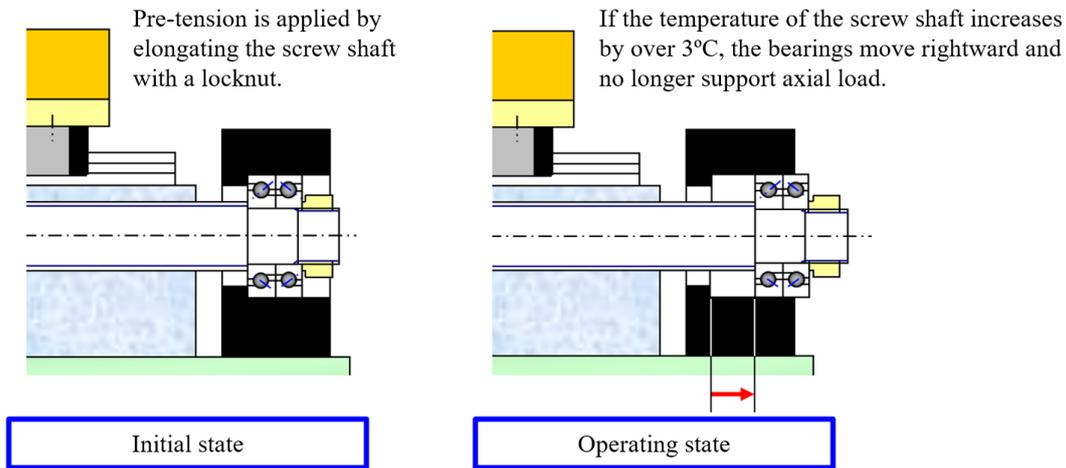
Changes in pre-tensioned bearing support structure on non-motor side under screw shaft elongation.
